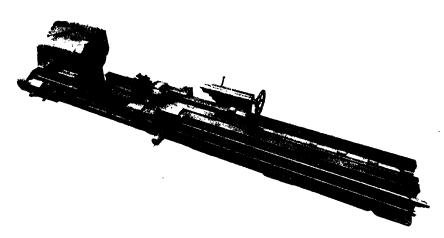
AN 184-IN. CENTRE LATHE ON A 34-FT. BED Electric push-button control is fitted on the saddle for control of spindle. (Denham's Engineering Co., Ltd.)
